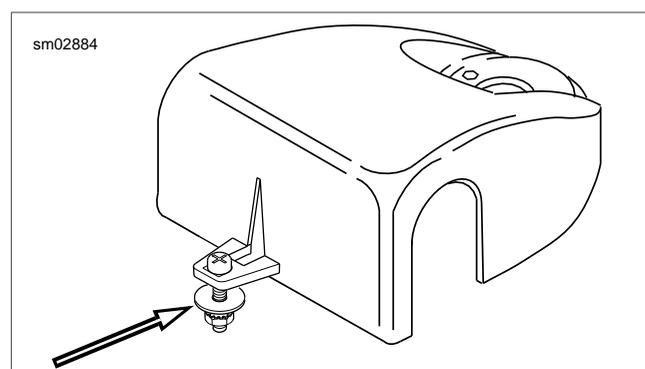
Handlebar Clamp Shroud and Screw Assembly
